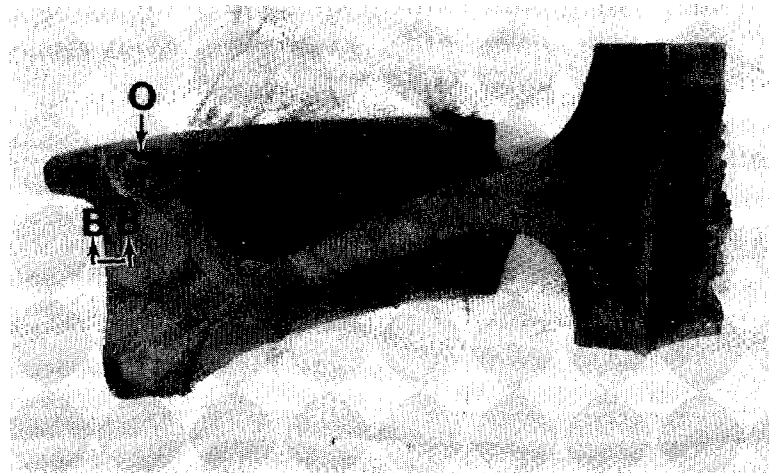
A. View of fracture in wheel section. Arrow "O" indicates origin location. X 1/4
